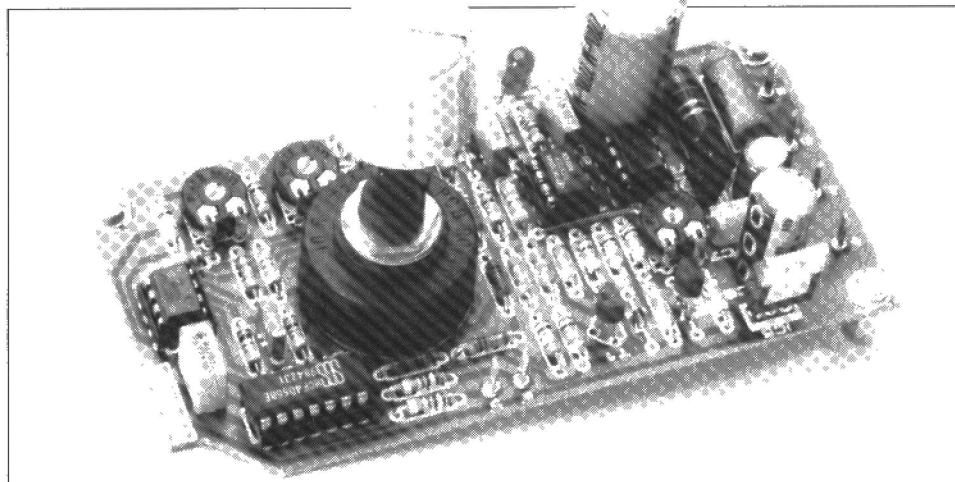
Completed circuit board, ready for fitting into the enclosure. Note that the left-hand bottom corner of the PCB is cut off diagonally.
